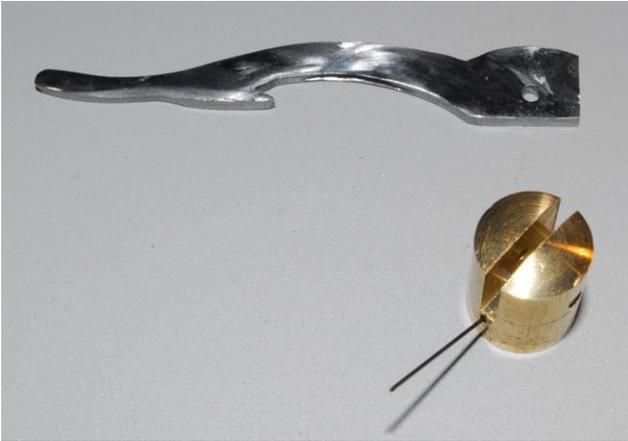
The fusee iron, mount and spring. Note the edge groove between the hook and the mounting hole for the spring.
